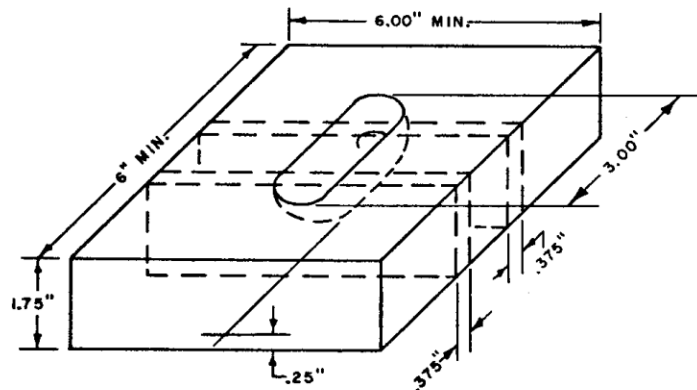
Locations for removal of guided side bend samples after welding. [51]
